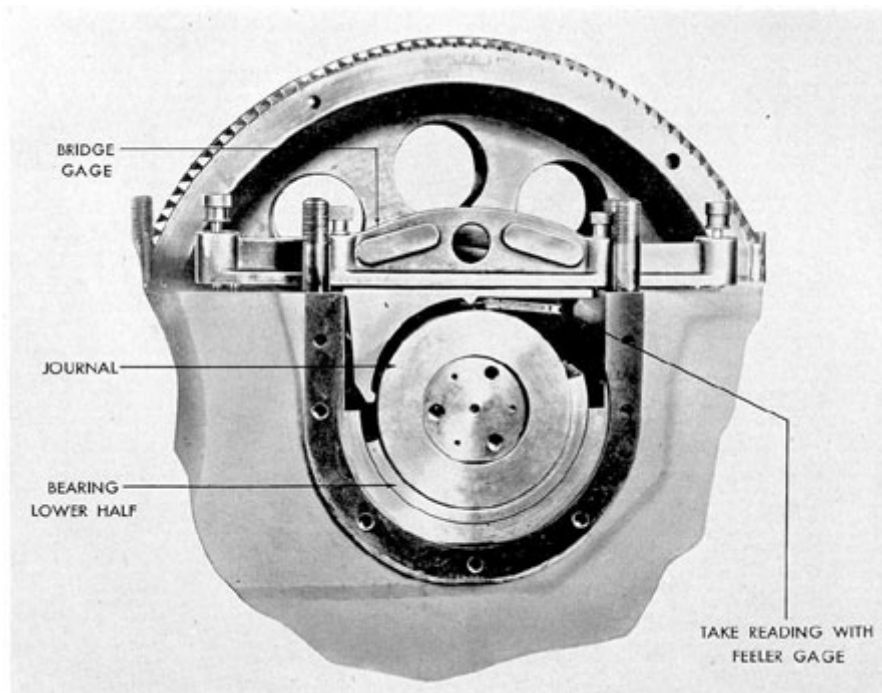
Using bridge gage and feeler gage to determine clearance.
